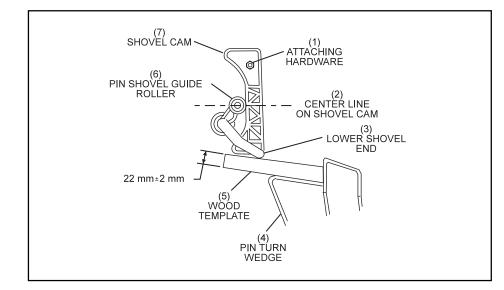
Elevator Pin Shovel Cam Adjustment.
